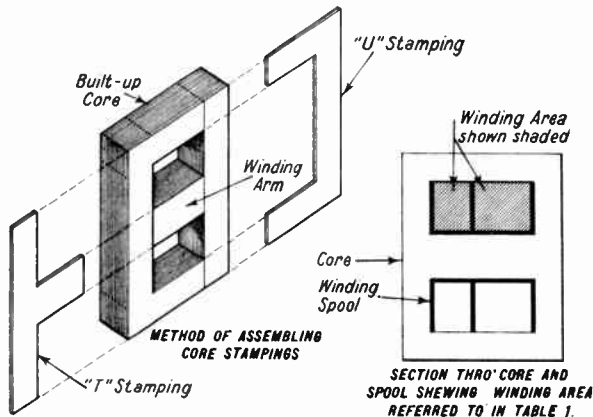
A.—DETAILS FOR MAKING CORE. Showing the method of assembling core stampings. Also, the winding area as referred to in Table I.
